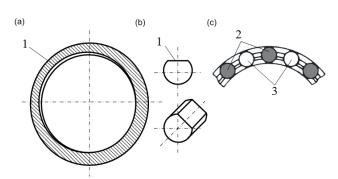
Destruction of inter-shaft bearing (part 2 in Fig. 47): (a) outer race of bearing, (b) roller of bearing, (c) cage with incomplete rollers. 1 - wear of material, 2 - rollers, 3 - no rollers.
